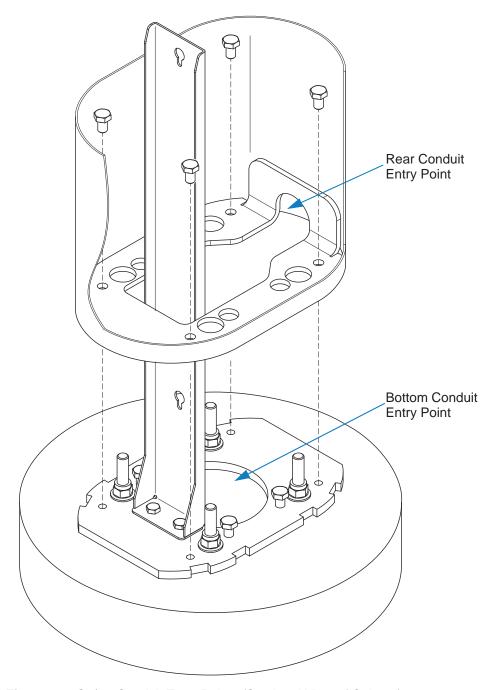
SV|51 Conduit Entry Points (Sectional View of Column)
